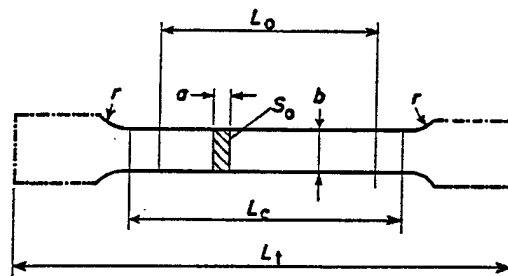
Dimension of The Rectangular Sample( American Standards ASTM E8M-88 )
